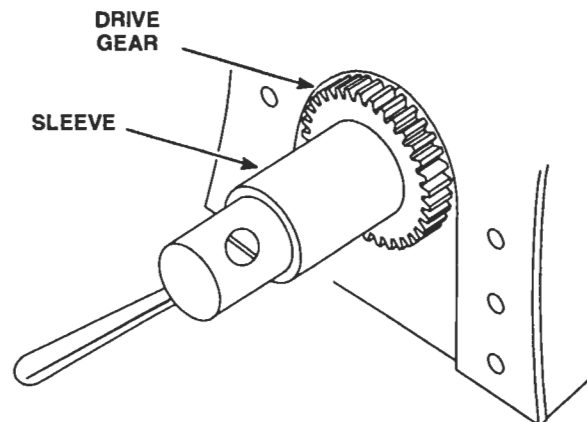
Installing Oil Pump Drive Gear on Crankshaft
